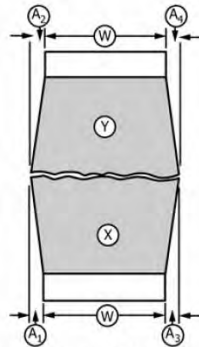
Halves of Broken Charpy V-Notch Impact Specimen Illustrating the Measurement of Lateral Expansion, Dimensions A₁, A₂, A₃, A₄ and Original Width, Dimension W
